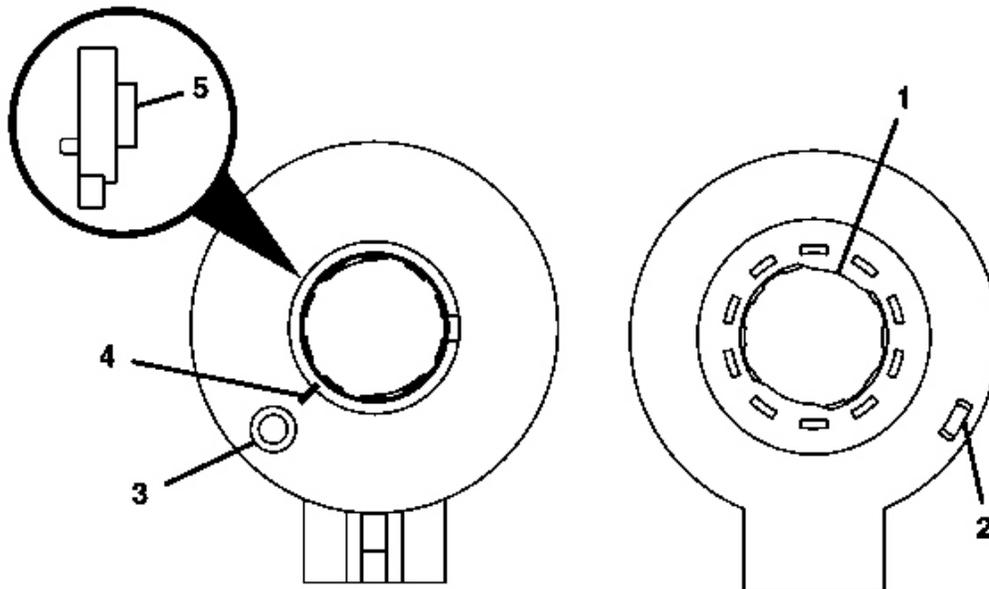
Steering Wheel Position Sensor Identification Points
